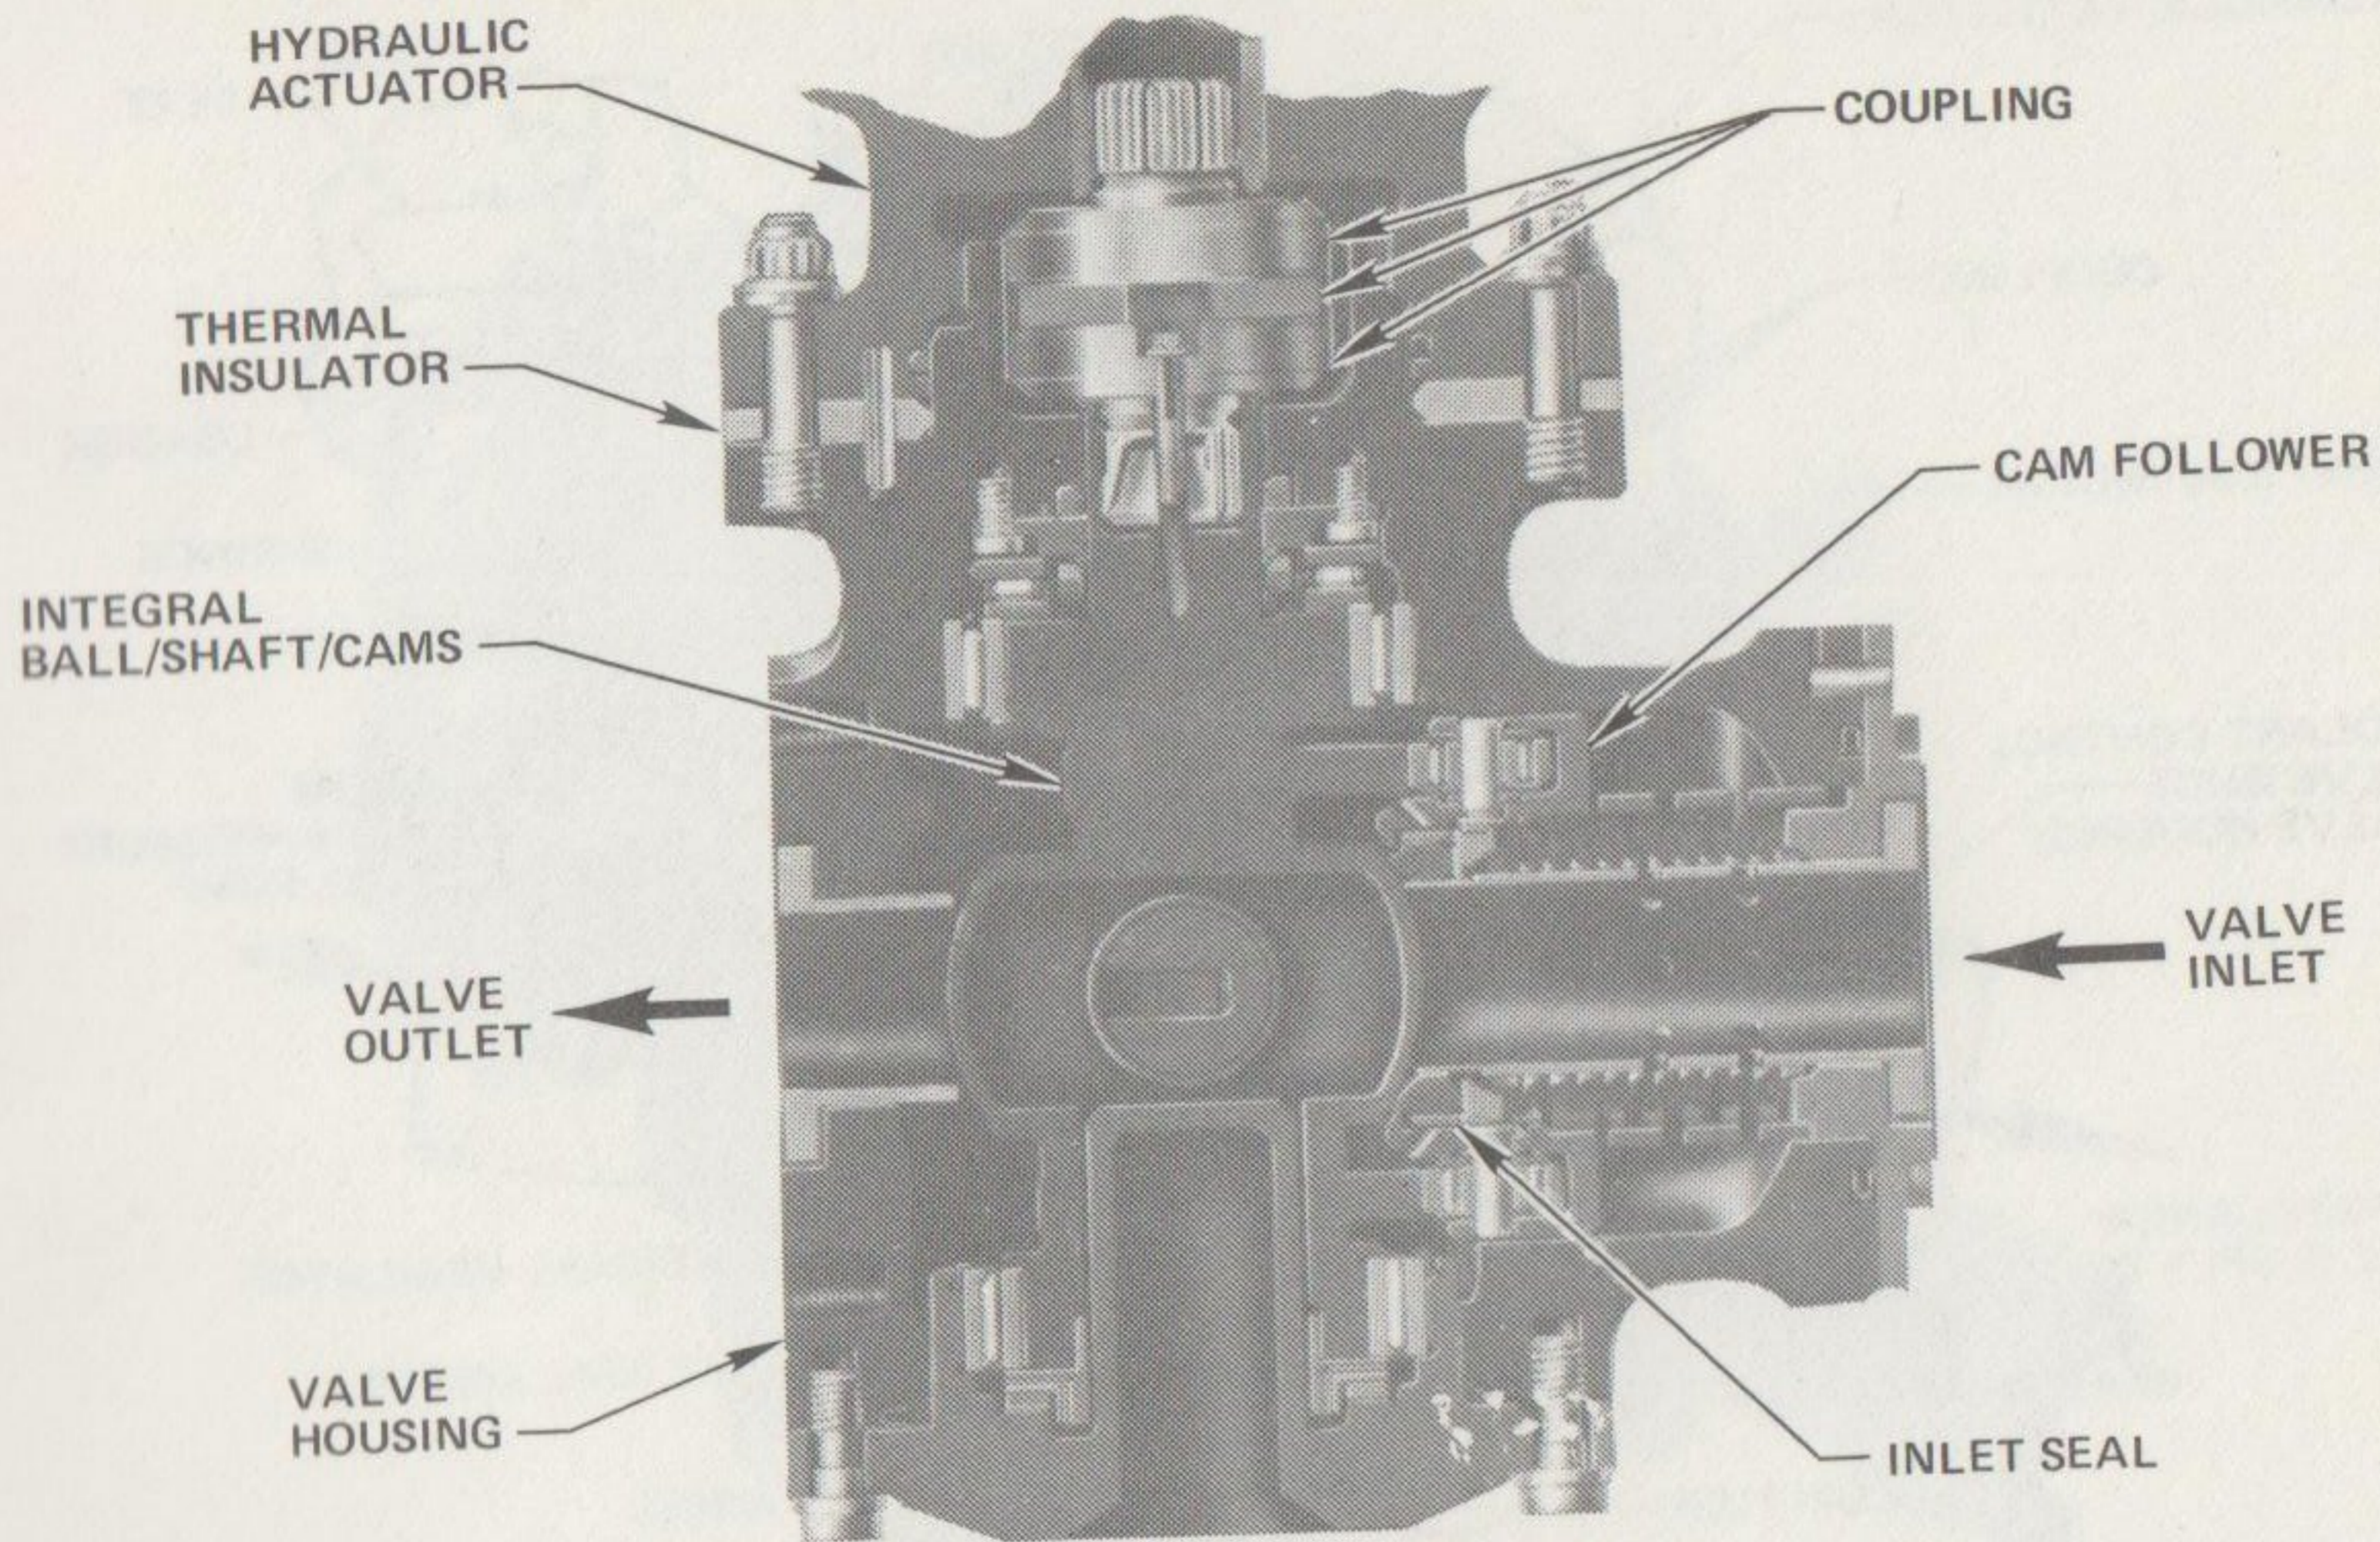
OXIDIZER PREBURNER OXIDIZER VALVE
